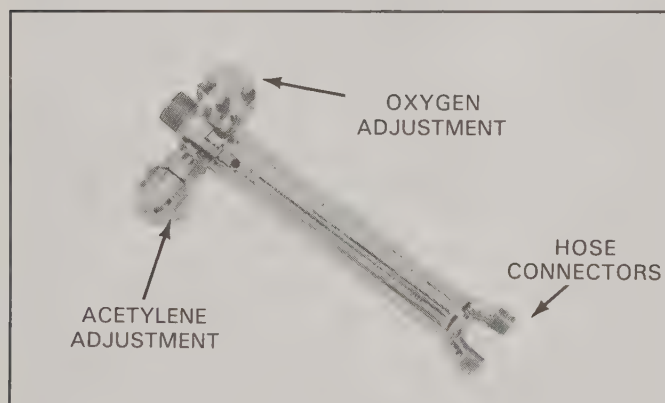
The torch handle has separate adjustment knobs for acetylene and oxygen flow. To prevent mismatching of hoses, oxygen connectors have a right-hand thread; acetylene connectors, a left-hand thread. (Uniweld)
